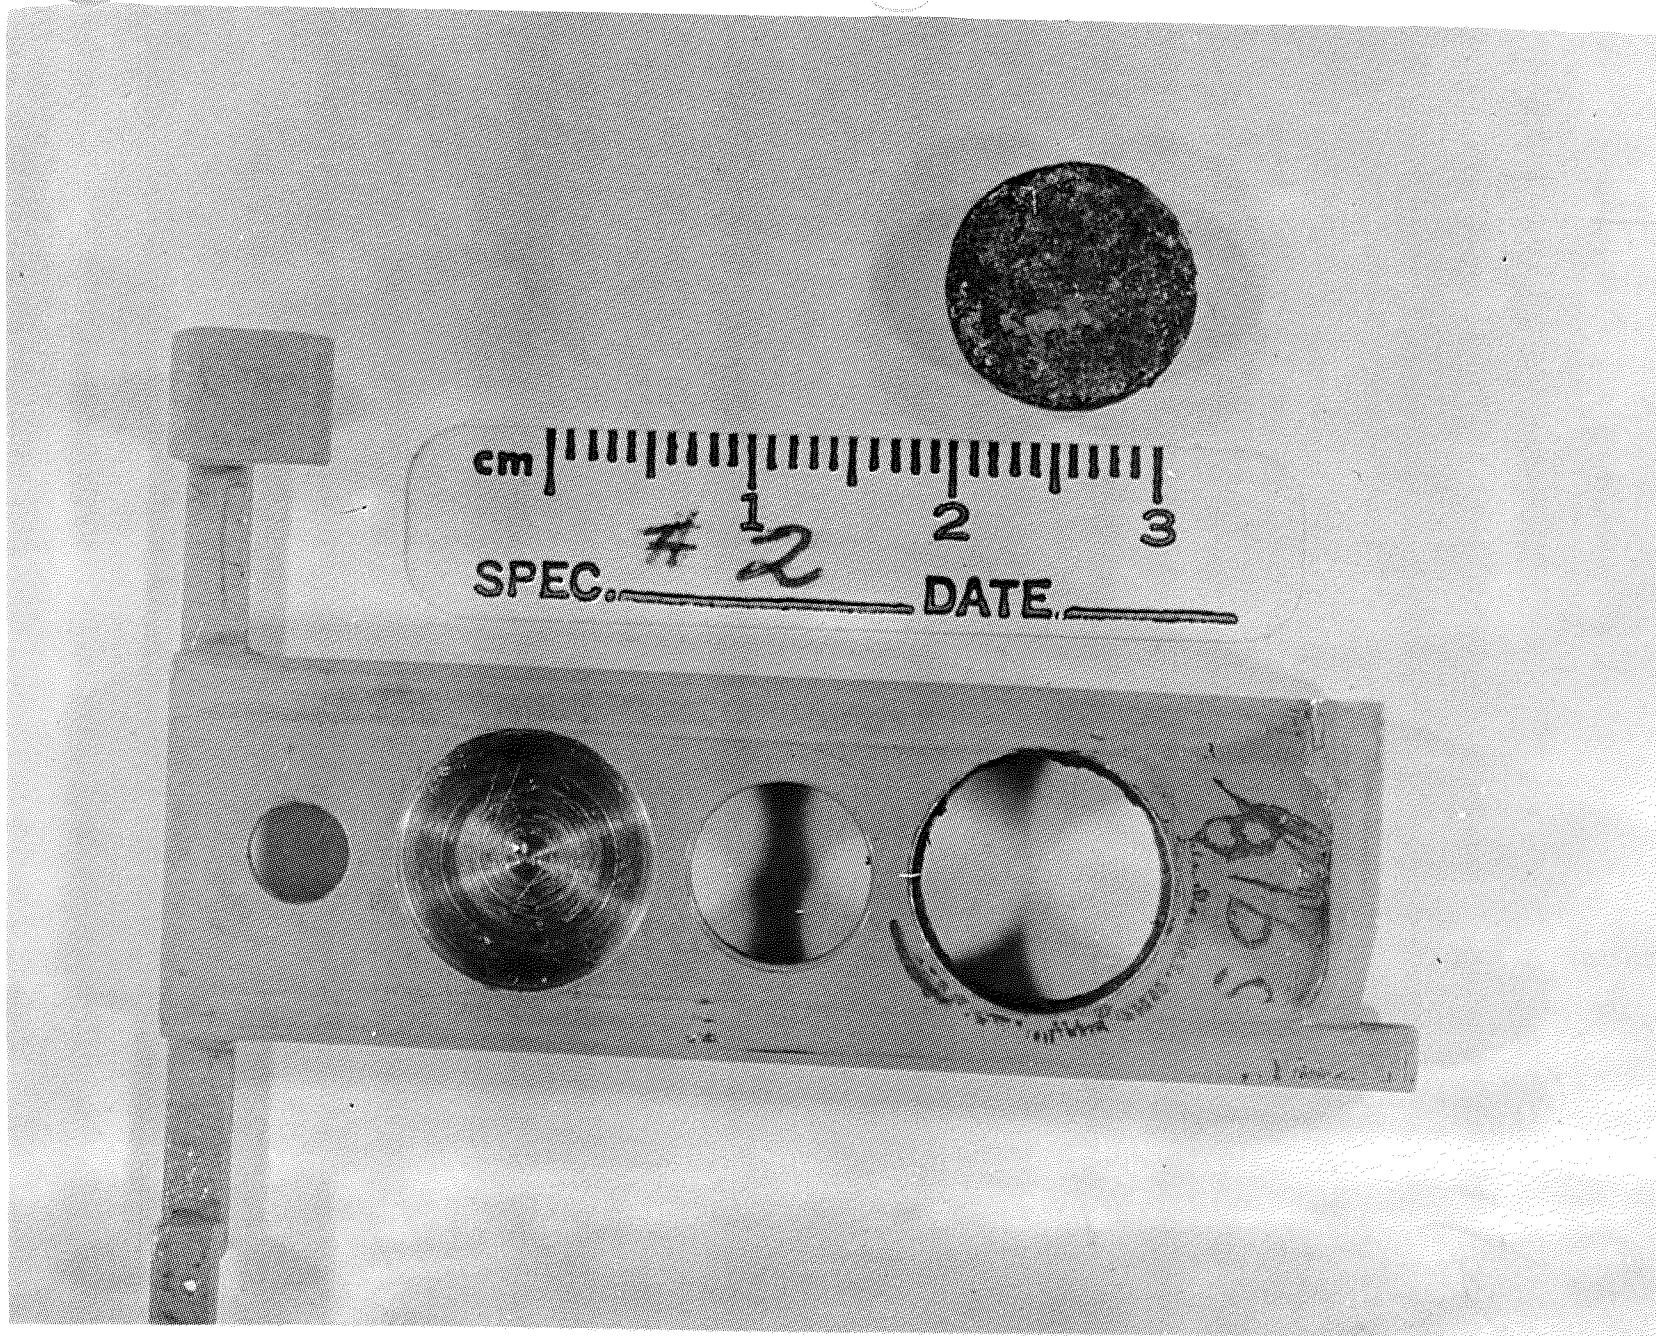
Failure Slide Showing Coined Disks (Side View)
